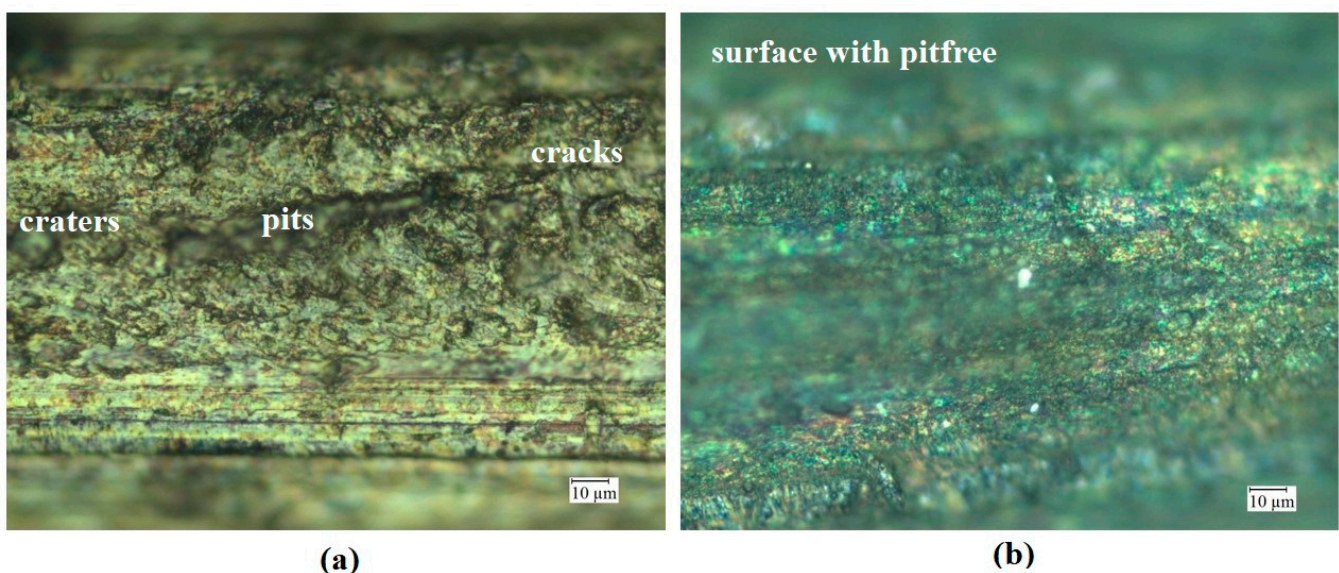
Surface Morphology of copper electrode after machining (a) Uncoated (b) Silver Coated.
